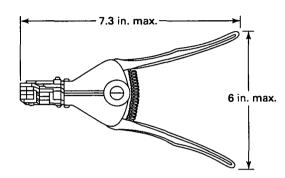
Type I, Class 1, Wire Cutter/Stripper,
